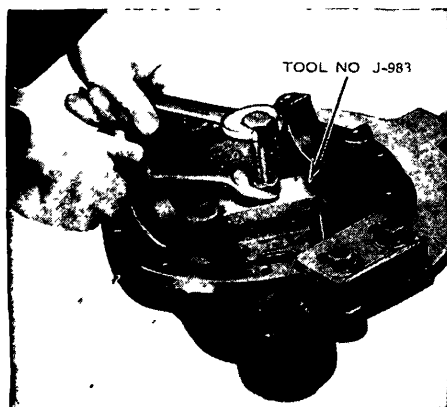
R moving drive pinion bearing out of race, 1937-46
